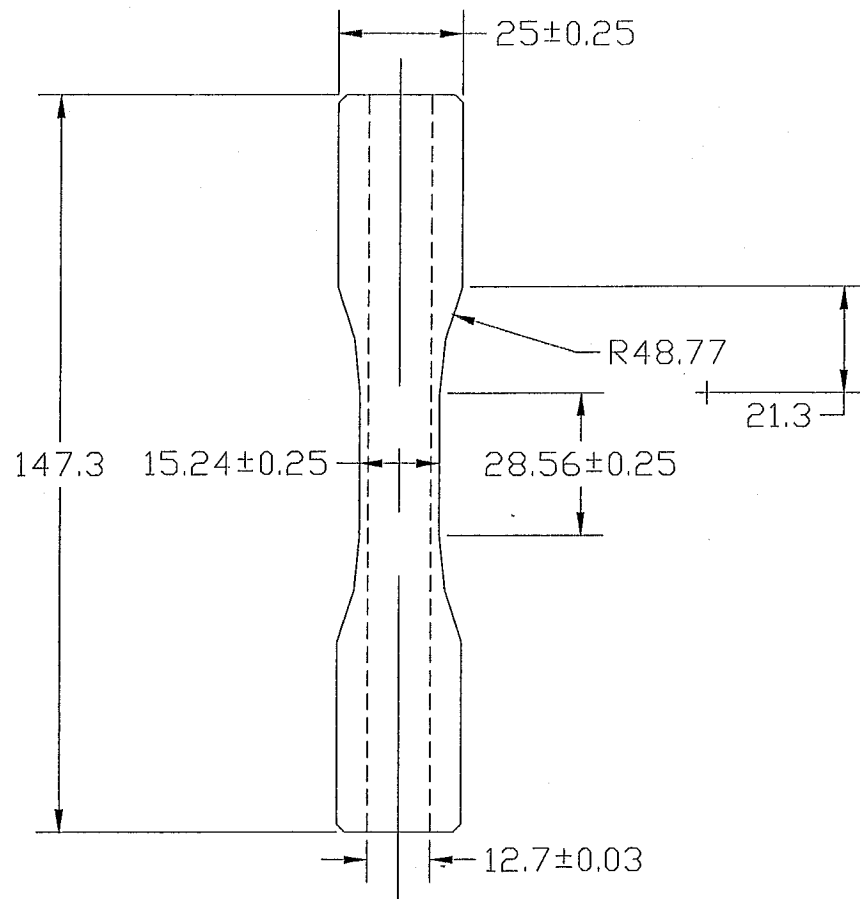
Specimen configuration and dimensions (all dimensions in millimeters)
